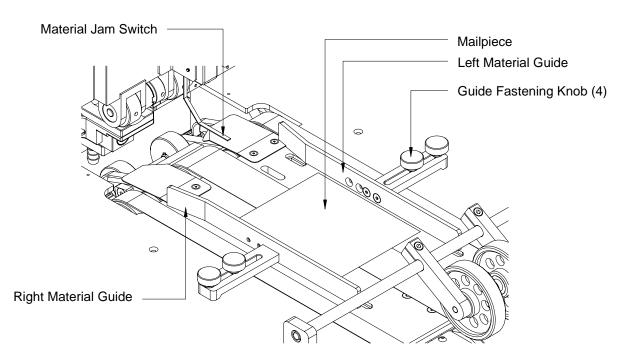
Outfeed section of the feed rollers illustrating the material side guides.
